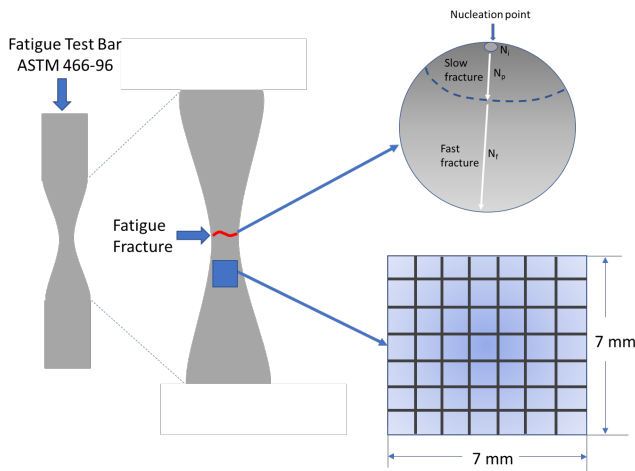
Schematic of the fatigue test bar, fracture location and the determinate fractography (stereomicroscopy) and light optical microscopy (porosity and λ_2 analysis).
